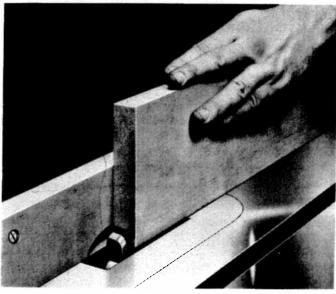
Making an Ogee Cut with the Moulding Cutter Head.
